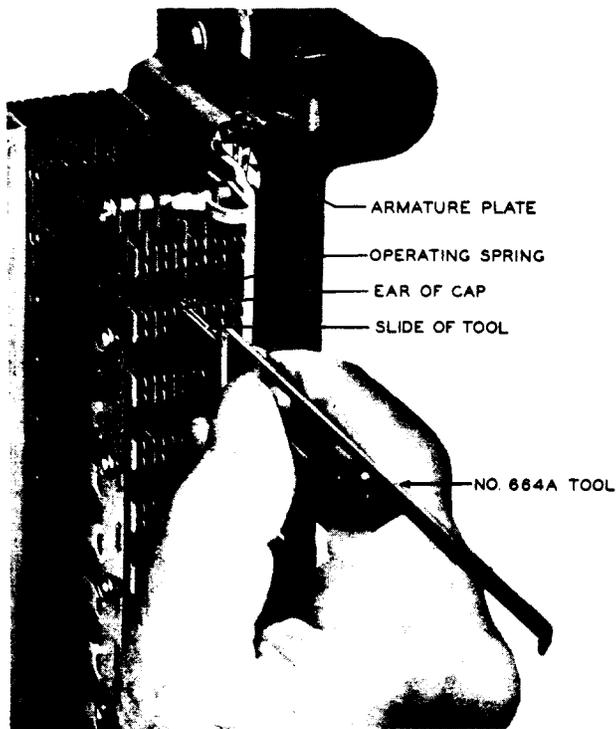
Mounting Operating Spring Stud Cap on 245-type Relay Equipped With Armature Plate
